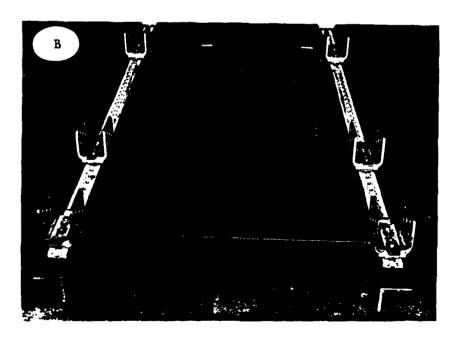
As-built stanchion pair (A) and welding jig (B).
